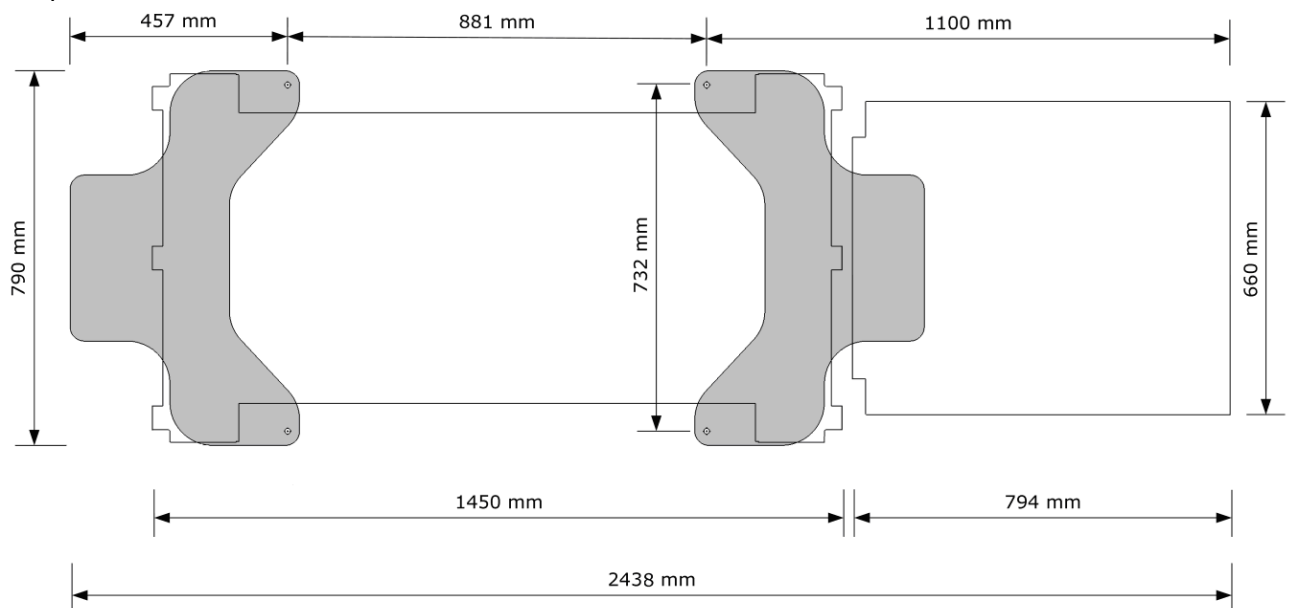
Sheep Auto Drafter and sorting unit dimensions.
